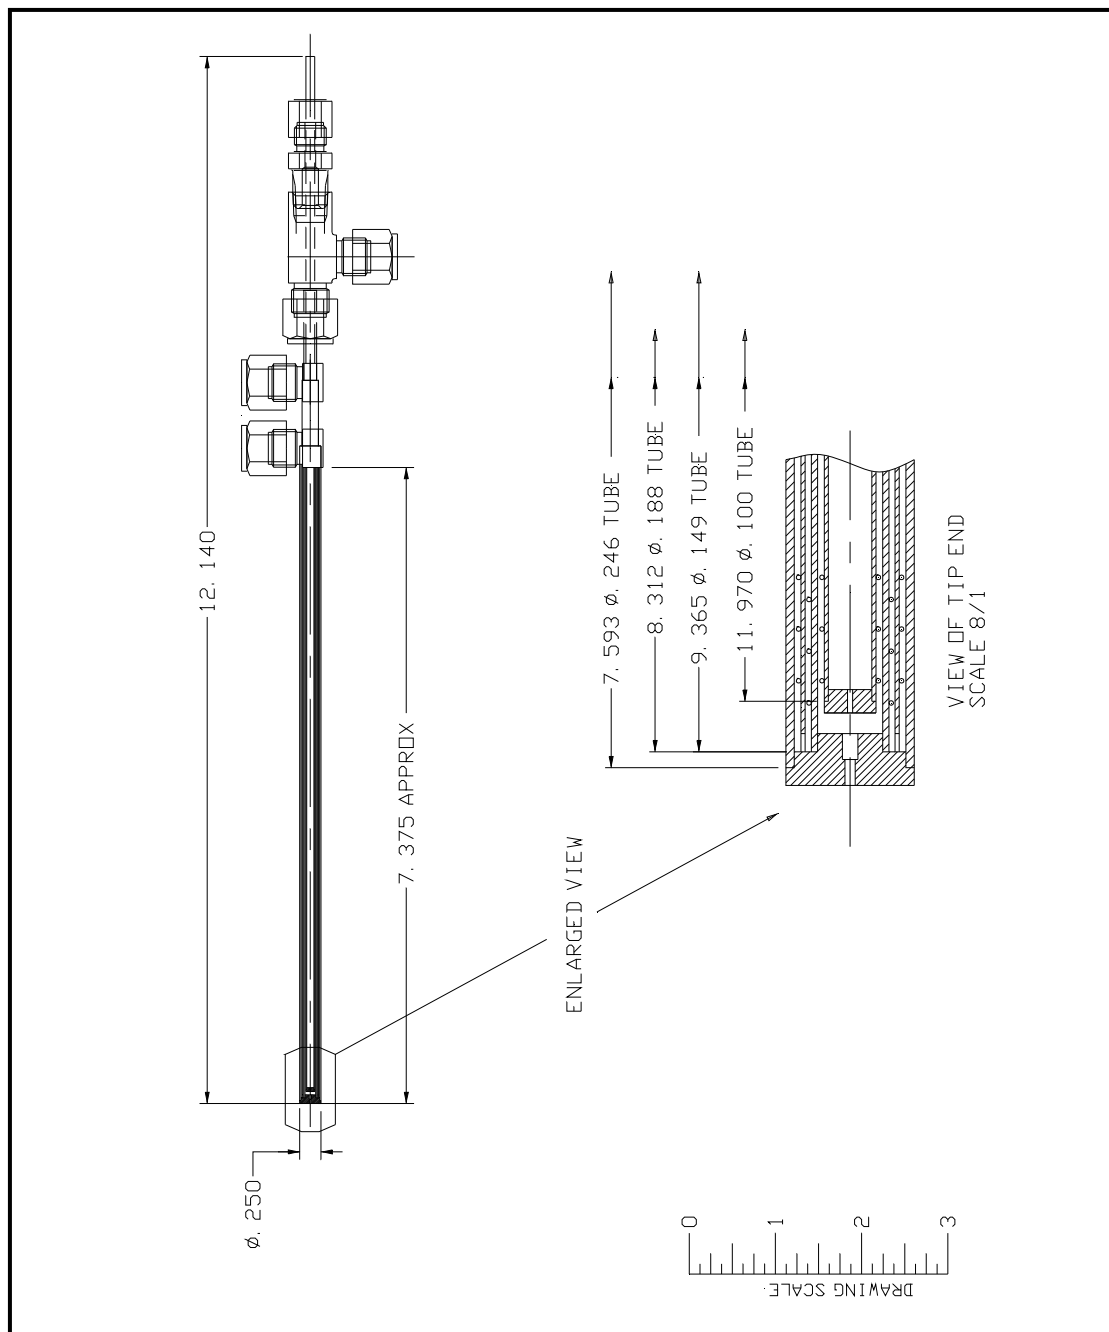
CAD Drawing of the SPP Prototype – Overall Assembly of the Air Cooled Nukiyama-Tanasawa Type Liquid Fuel Atomizer (Filename: sppatomizer.dwg).
